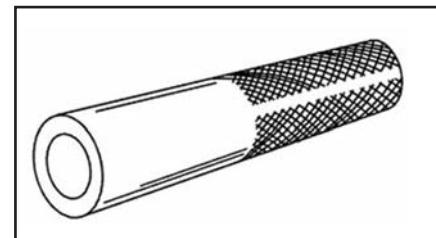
Use a hammer pin driver to install the bracket dowel pins in the engine block.
